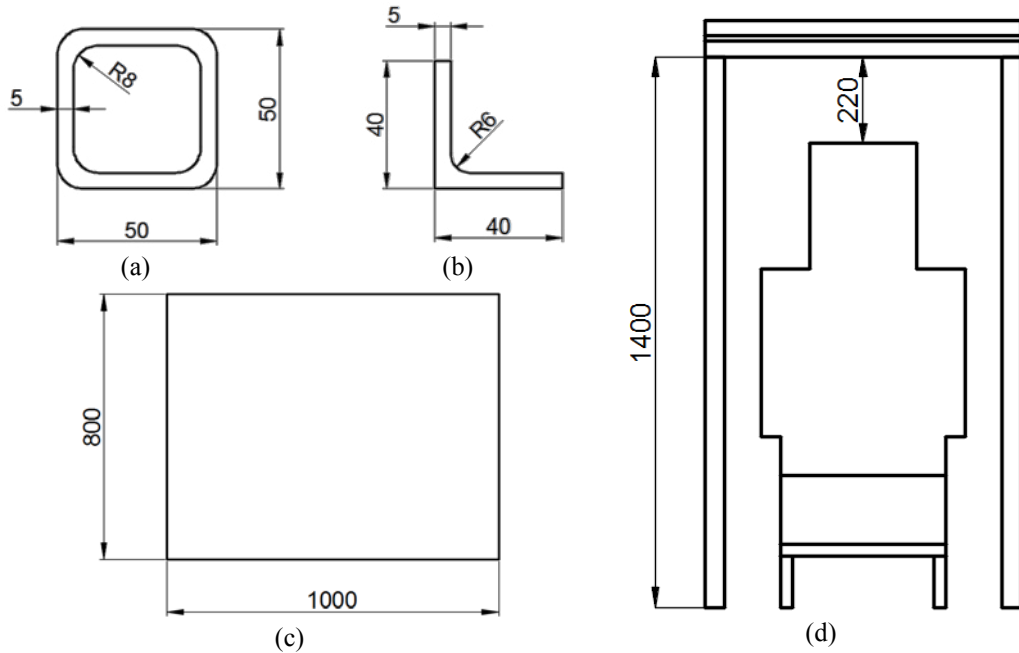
Cross sections and dimensions of (a) struts and (b) L bars used for the frame; (c) dimensions of the honeycomb protective roof; (d) Deflection Limiting Volume (DLV) - roof distance and struts height.
